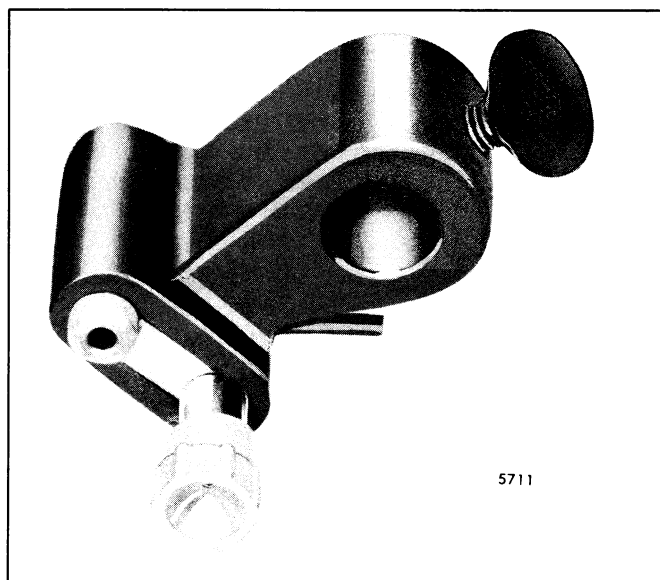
Injector Tester J 23010-A Clamping Head (J 23010-169)
